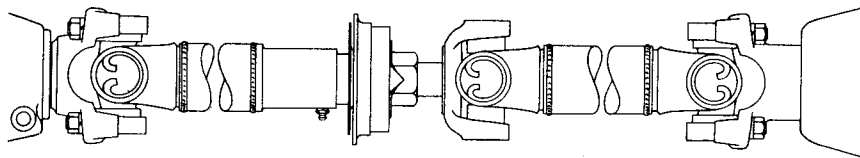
METHOD OF ASSEMBLING DRIVE LINE
